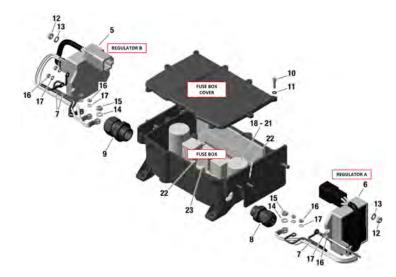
FUSE BOX EXPLODED VIEW
